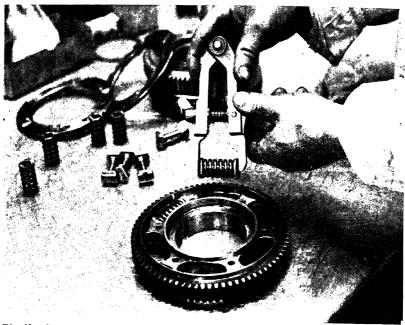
Showing compressing tool for assembling spring drive pads and springs to spring drive gear.
